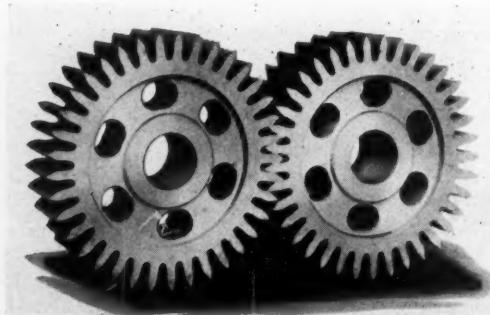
Flexible tooth gears have epicyclodial addendums with radial flanks
